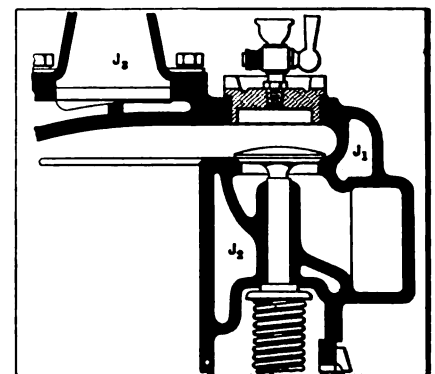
Showing water cooling around valve head with the metal of uniform thickness
